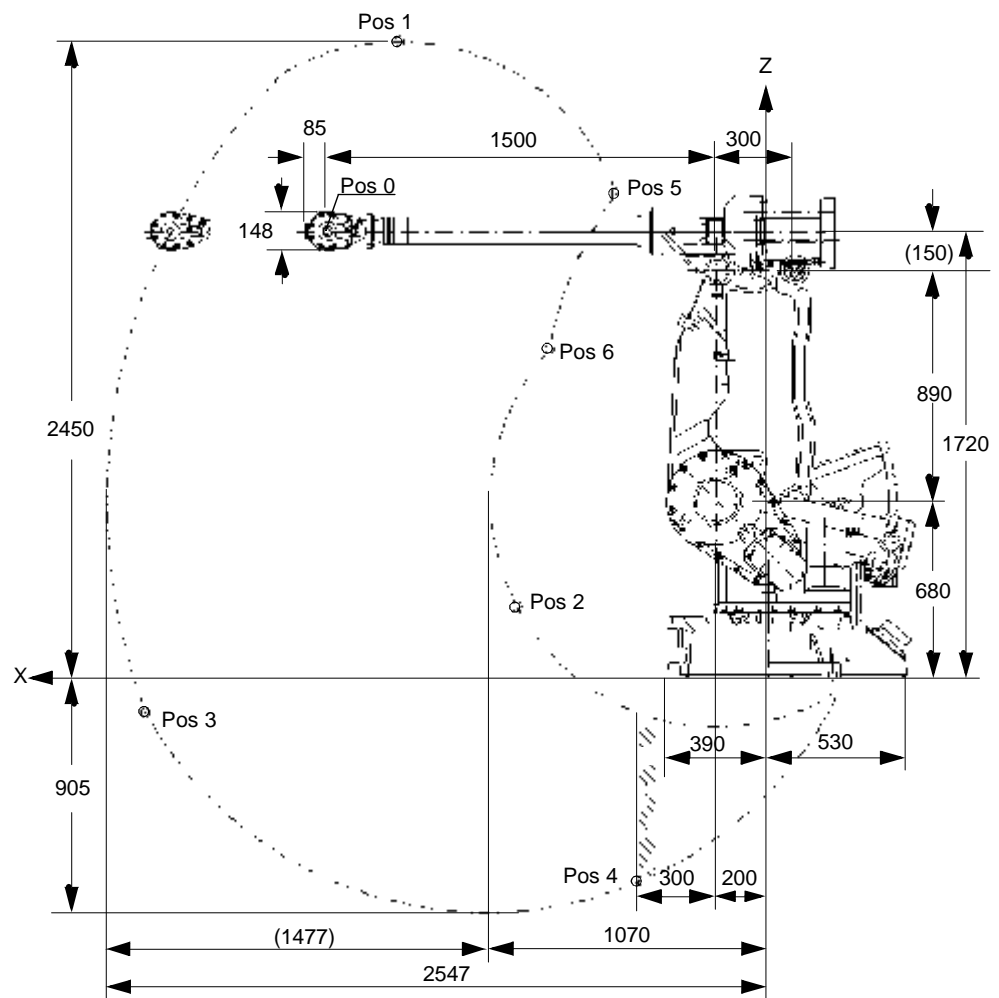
The extreme positions of the robot arm IRB 4400/L10 (dimensions in mm).
